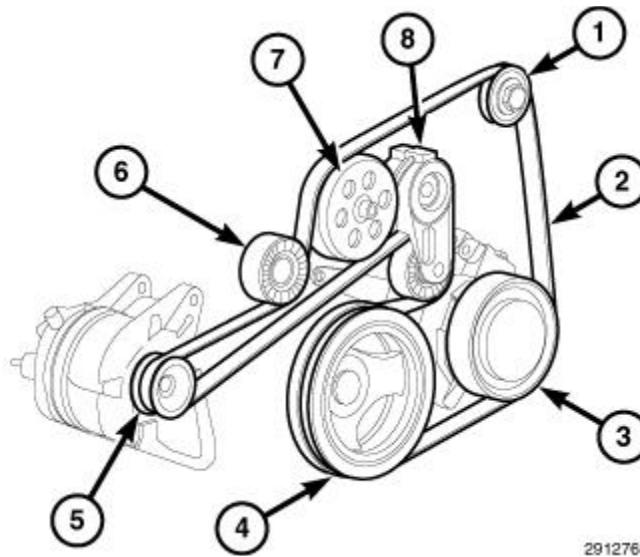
Drive Belt Tensioner And Drive Belt Routing
